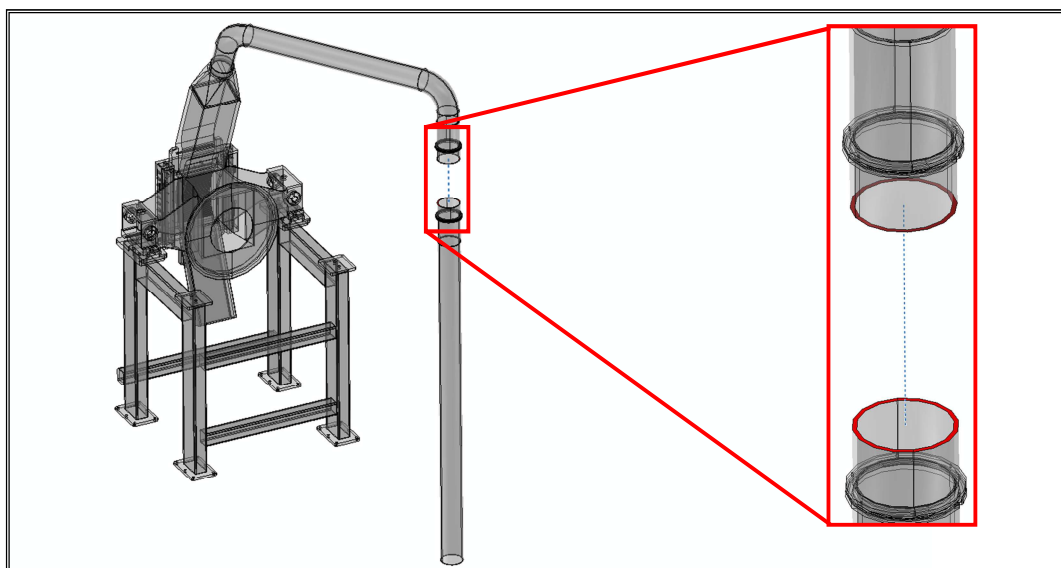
The Lithium inlet pipe flanges connected by the gimbal expansion joint.
